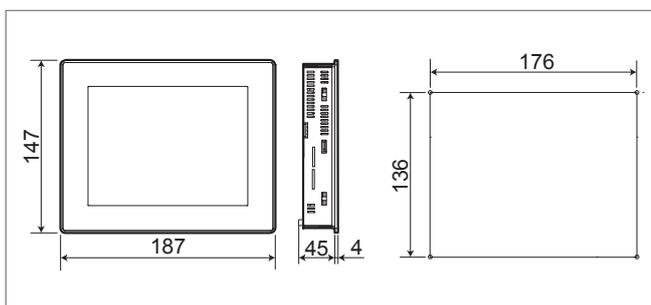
Dimensional drawing and borehole diagram for the system operator terminal (dimensions in mm)
